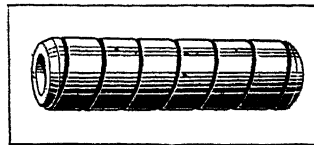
THE HYATT ROLLER, A BEARING WHICH IS A SPIRAL CORD AND FLEXIBLE BOTH AS TO DIAMETER AND STRAIGHTNESS
